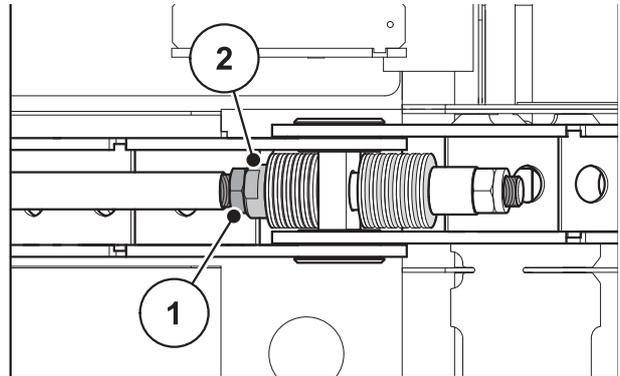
Change holding tension on the third hydraulic cylinder.
